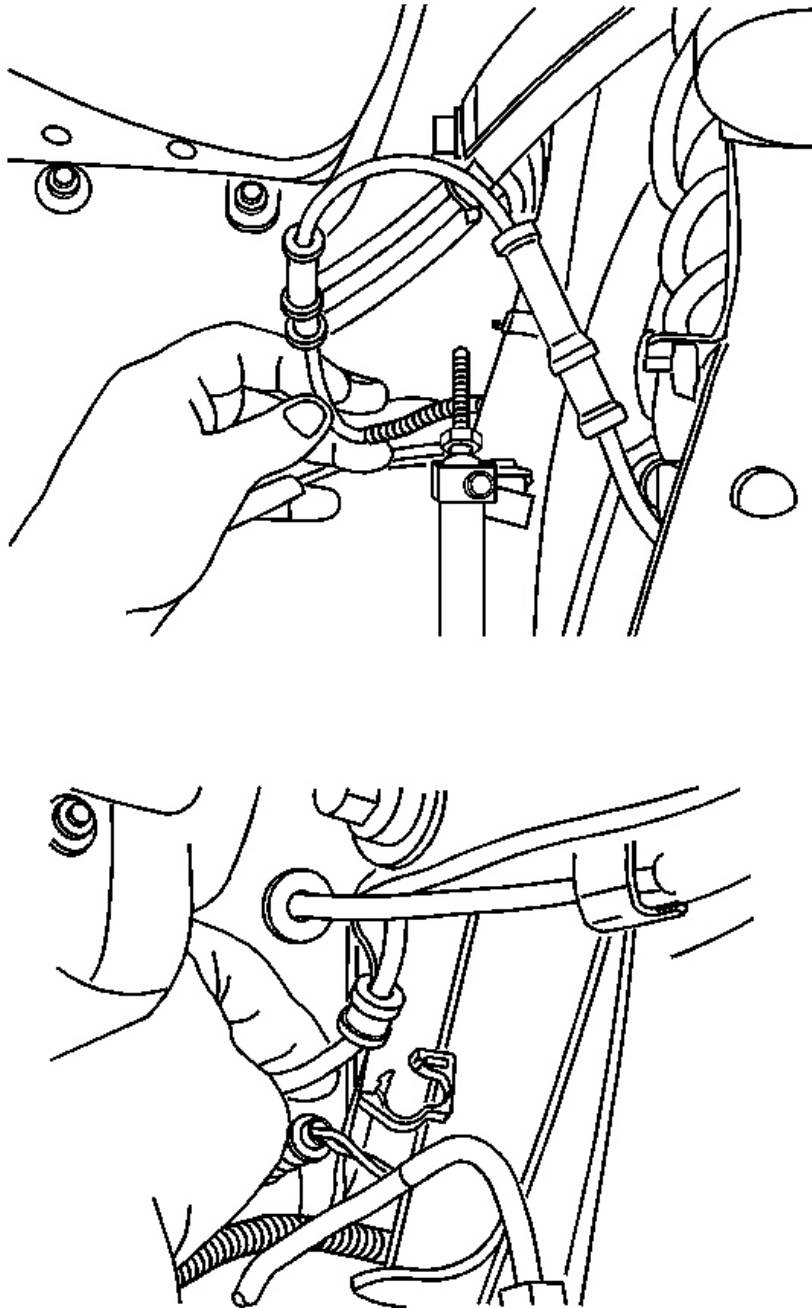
Identifying Wheel Speed Sensor Wiring Harness
